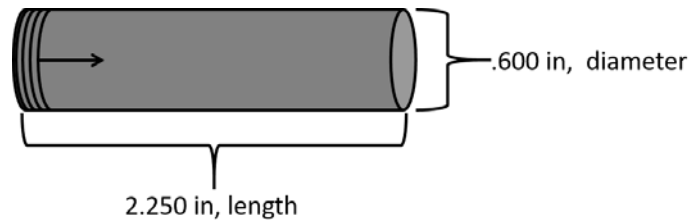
Horizontal quasi-static compression testing specimens
